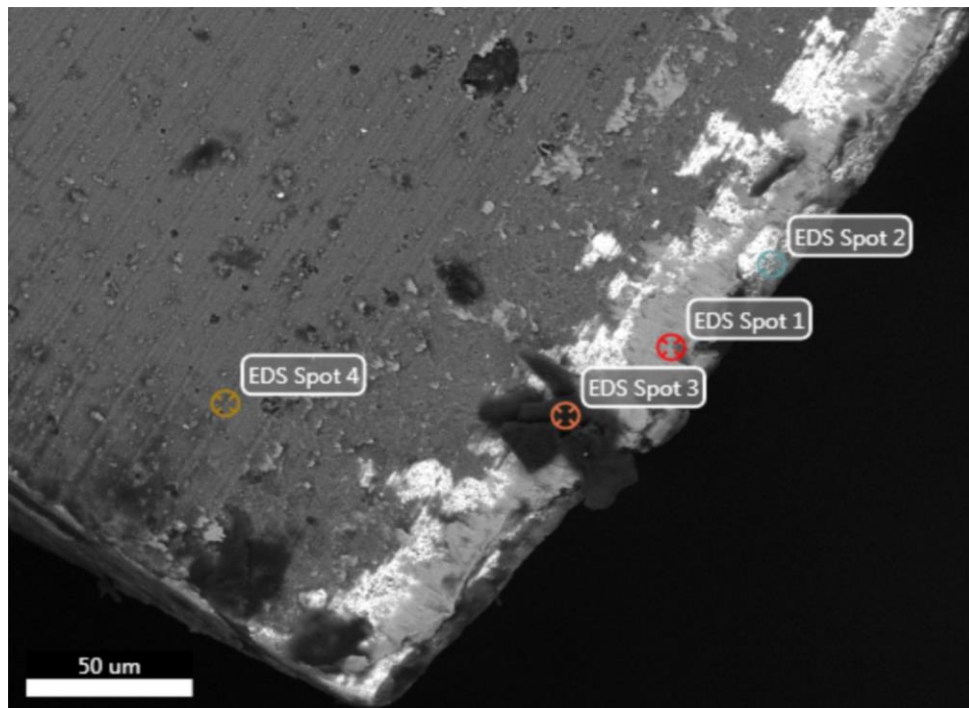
EDS spot analysis of the carbide drill bit cutting edge after drilling 60 holes in PM titanium.
